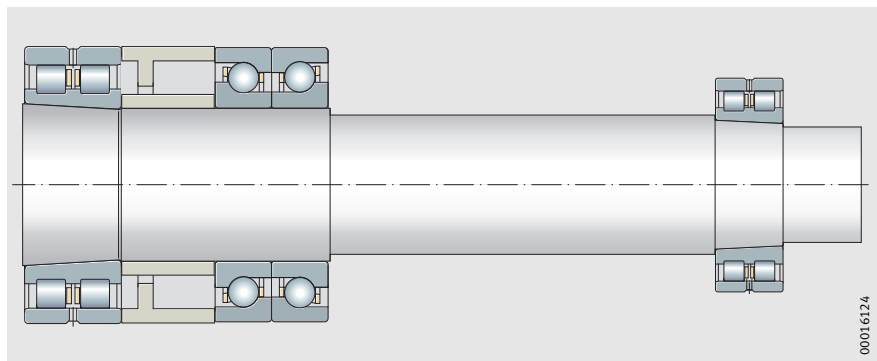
· Bearing arrangement with high speed axial angular contact ball bearings
